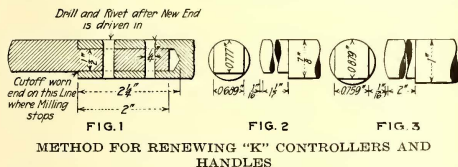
Method of renewing handle fit on controller shaft. Fig. 2—Handle end of shaft for K-10, K-11, K-12, K-27 and K-63 controllers. Fig. 3—Handle end of shaft for K-6, K-28, K-29, K-36, K-36, K-40, K-51 and K-66 controllers
